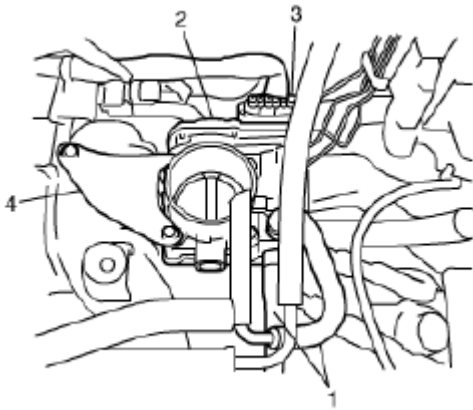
Identifying Stiffener, Connector & Engine Coolant Hoses
